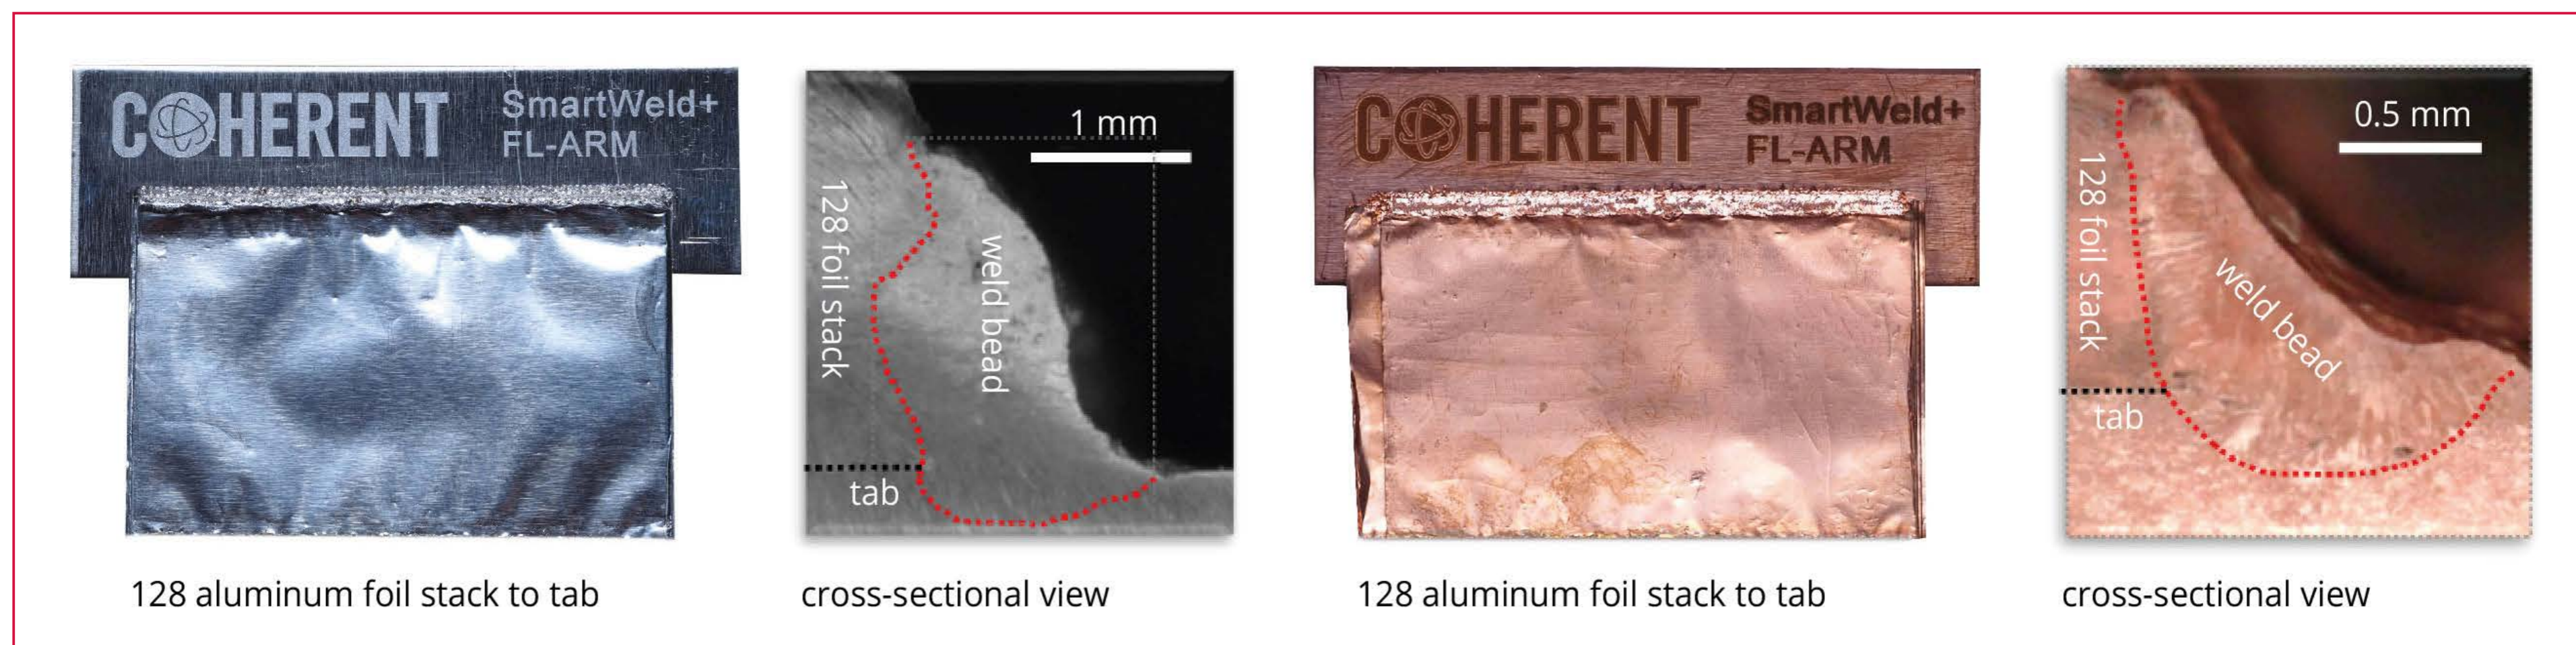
Examples of foil stacks for pouch cells out of aluminum and copper
